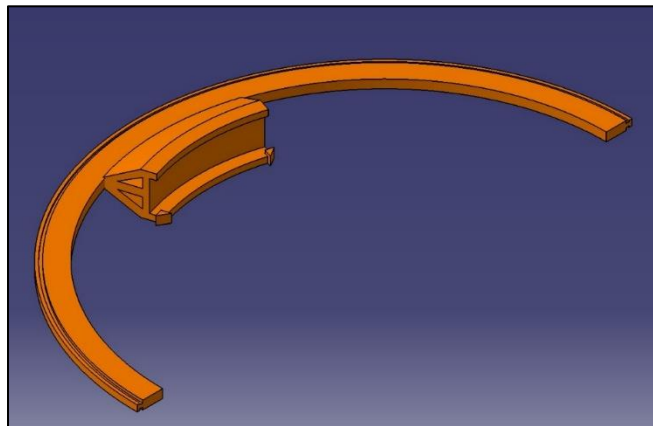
Isometric view of the VASIMR U-shape Fixture
